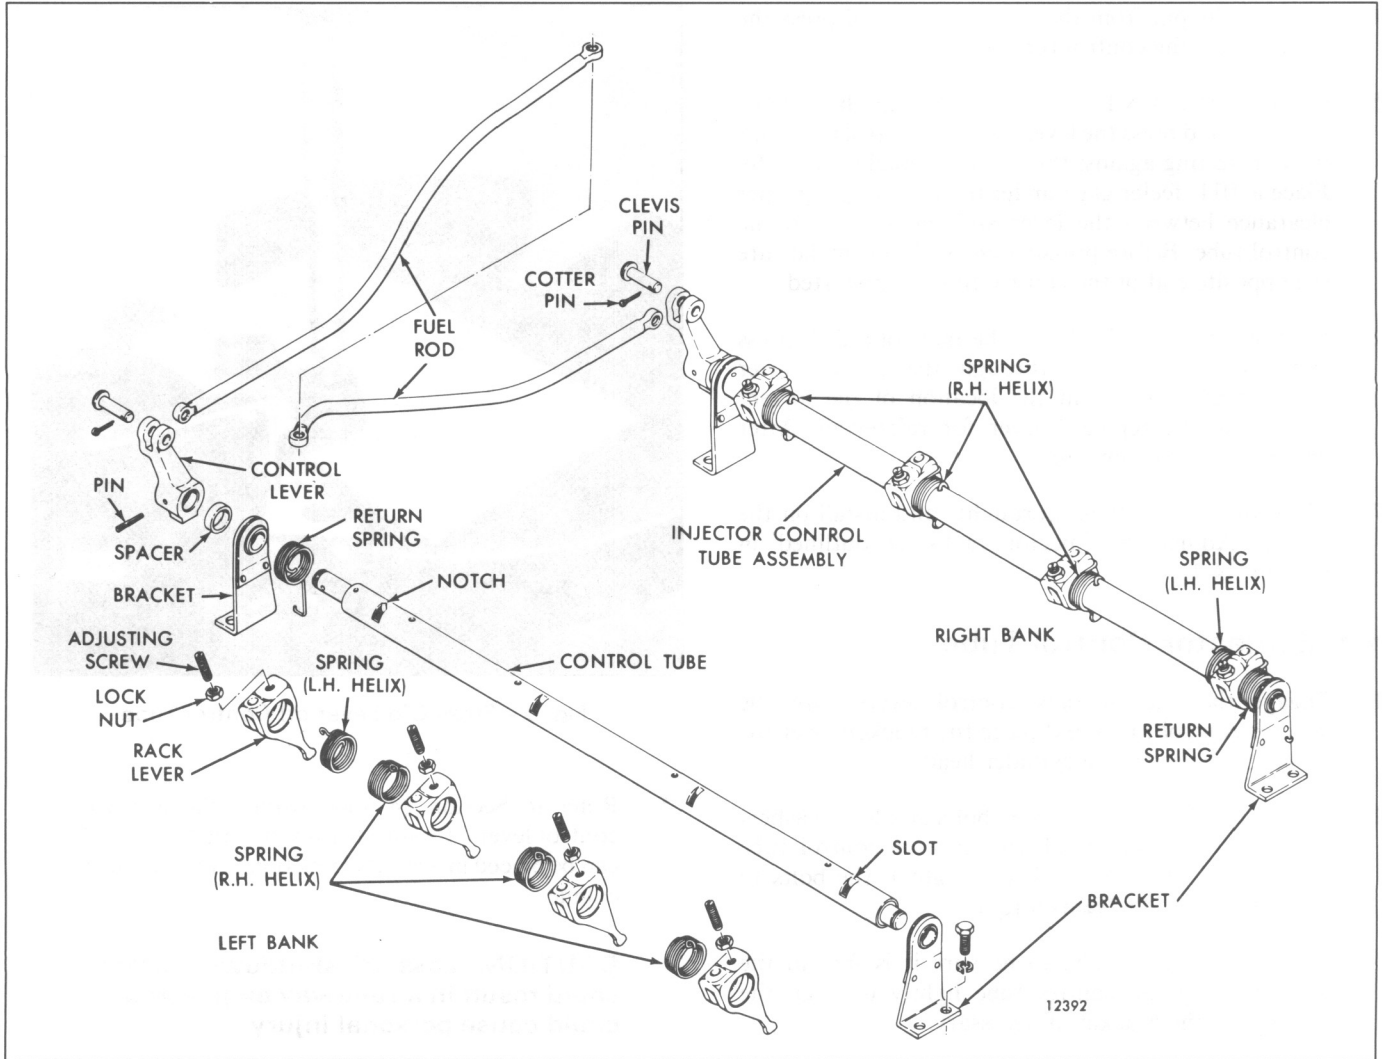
Injector Control Tube Assemblies (Spring-Loaded)
